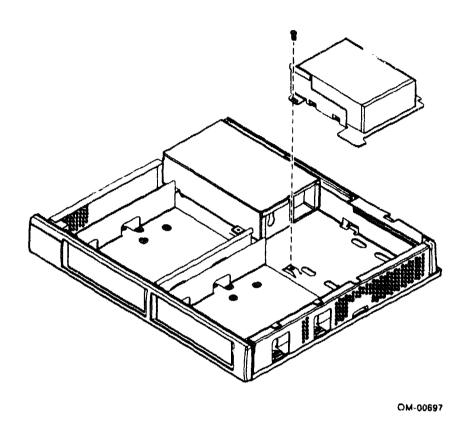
Removing a SCSI Device (3.5-Inch Mounting Tray)
